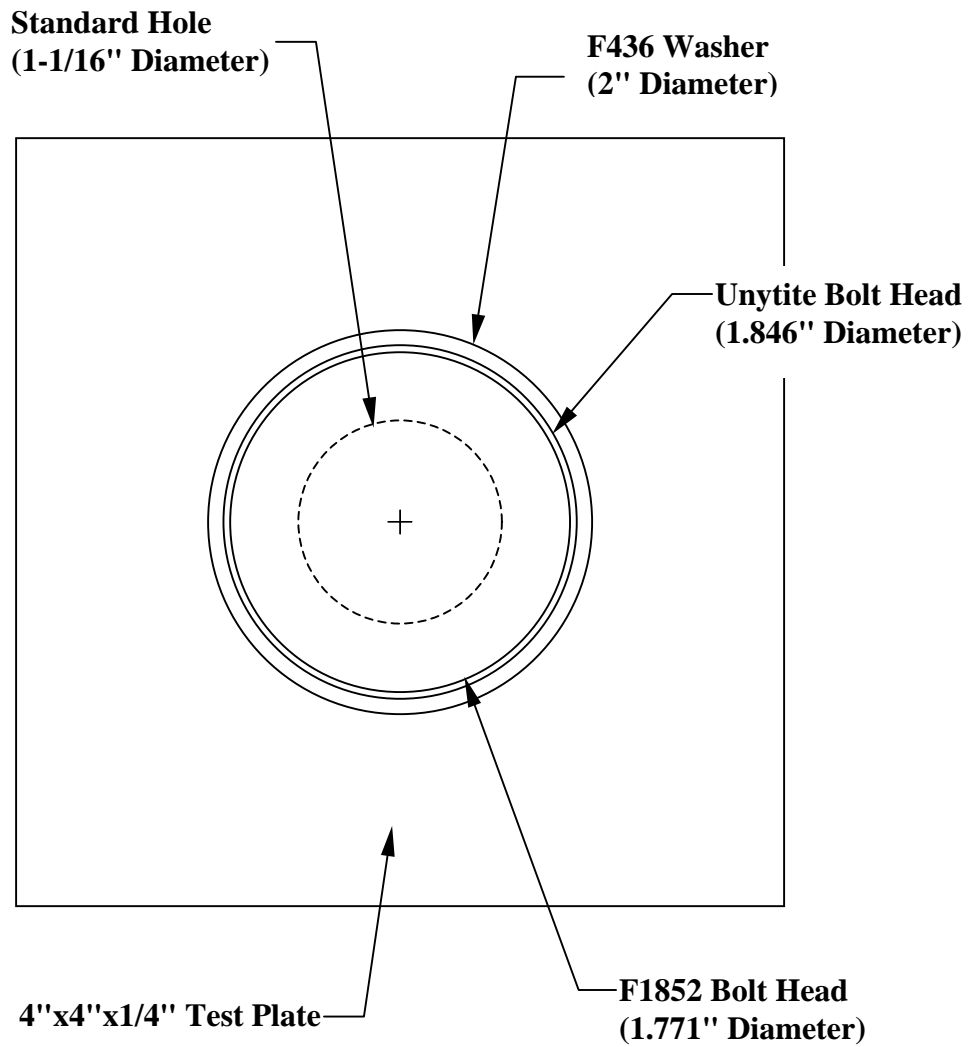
Bolt and Plate Layout for 1" Bolt in Standard Hole
